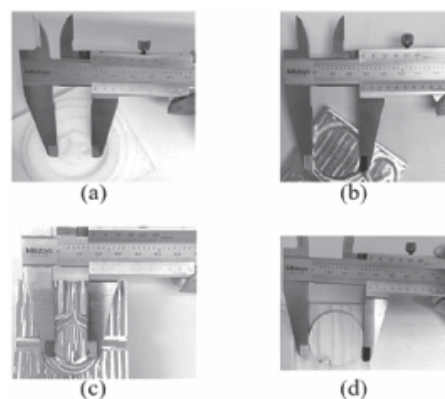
Some mechanical parts fabricated by mini CNC milling machine
